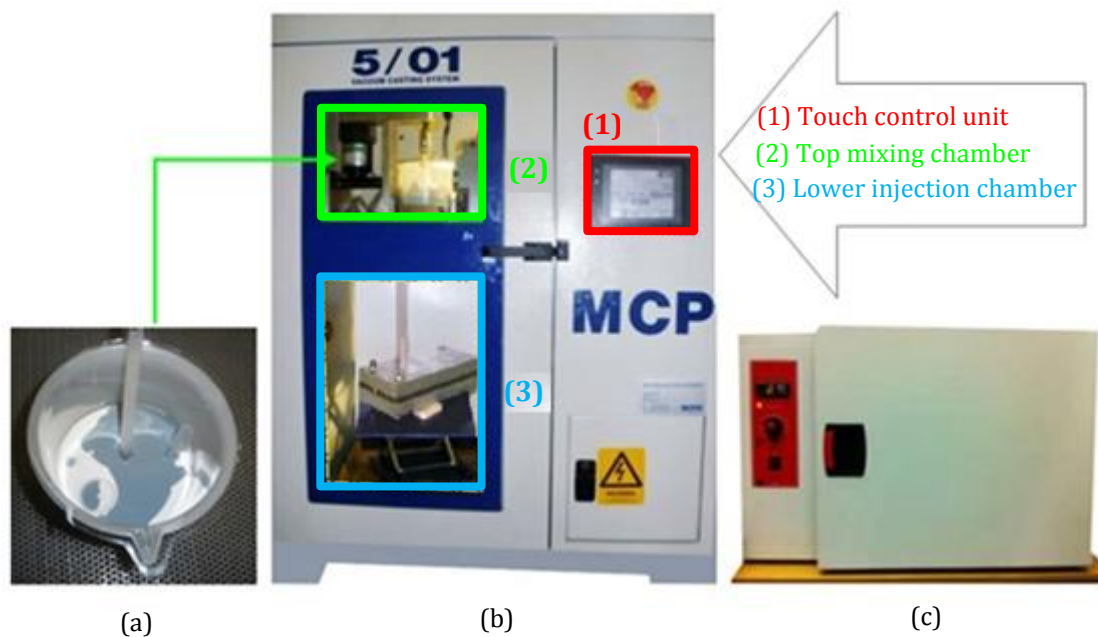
Fabrication equipment for SiR rectangular samples: (a) mixing components(A/B); (b) vacuum casting machine; and (c) oven.
